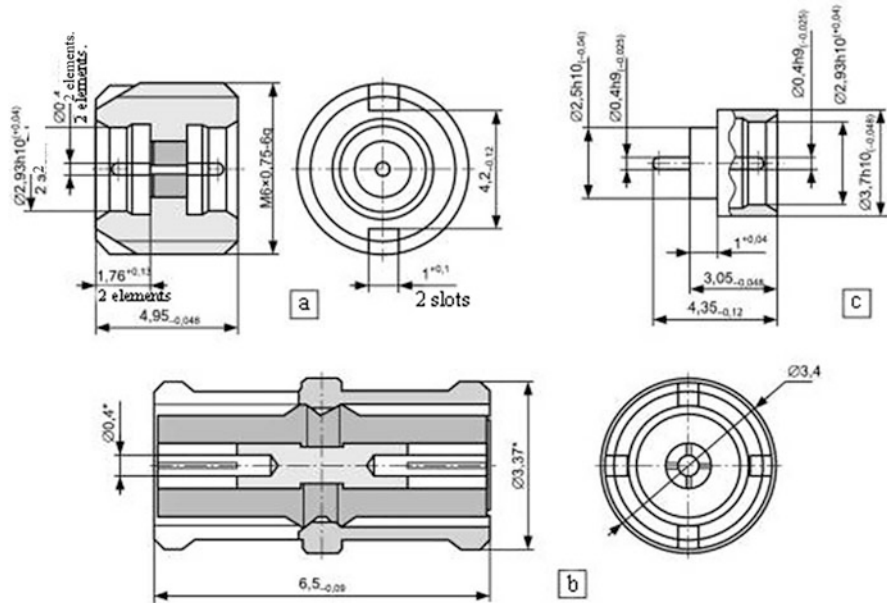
Typical design of Carlisle connectors. Here: (a) straight cable socket KAPD.434511.020; (b) sealed connector (adapter) KAPD.434511.021; (c) socket-to-socket connector KAPD.434511.023
